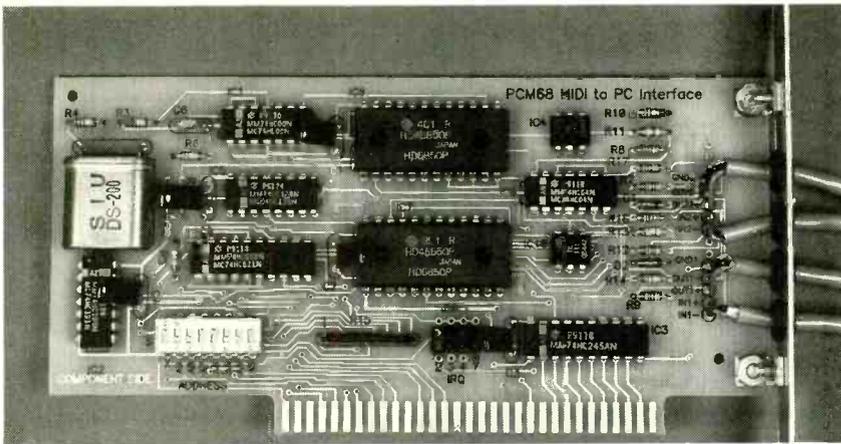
THE COMPLETED PROTOTYPE CARD. The MIDI jacks are wired directly to the circuit board using shielded twisted pair.
